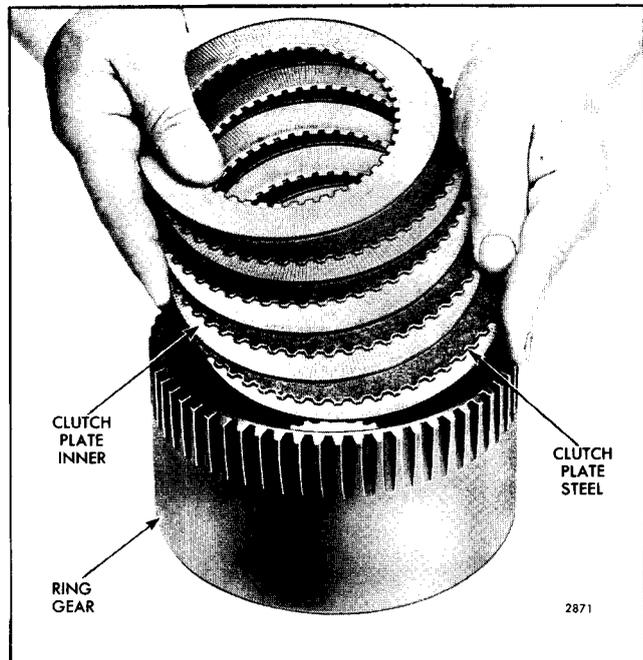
Position of Forward Clutch Plates for Assembly in Ring Gear
